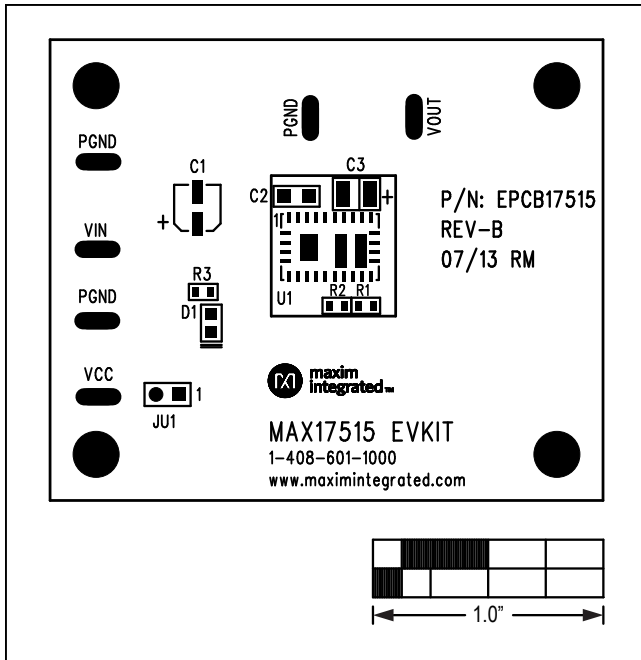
MAX17515 EV Kit Component Placement Guide—Component Side
